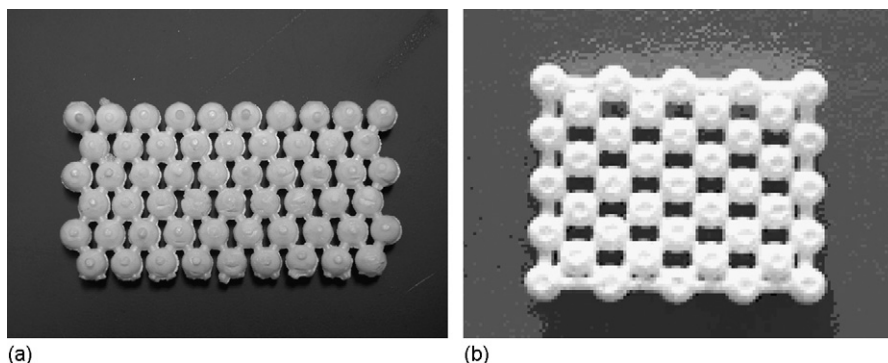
(a) Polystyrene pattern formed in stainless steel mold. (b) Polystyrene pattern formed in aluminum mold.
